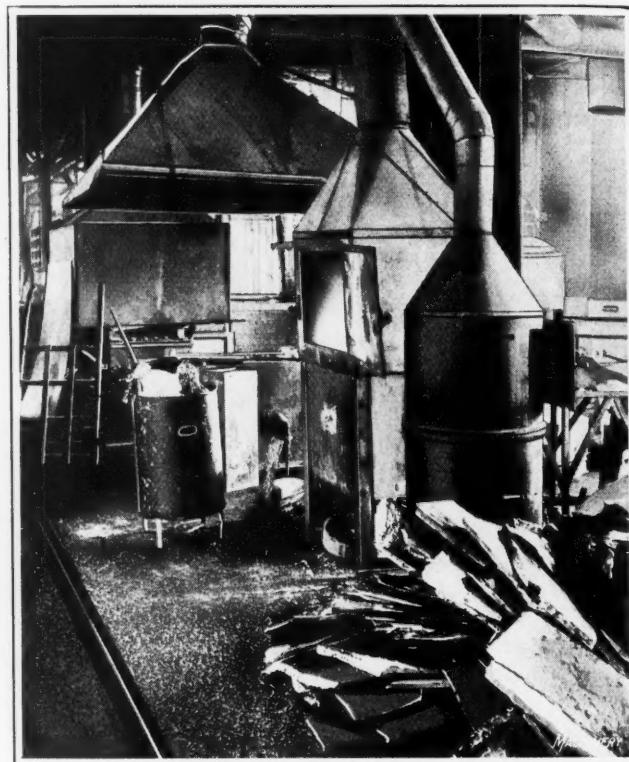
Furnaces used for the Recovery of Solder from Sheet Metal
